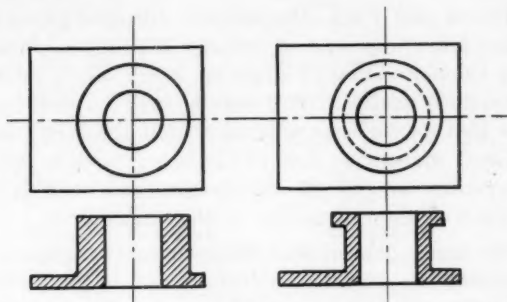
FLANGE BODY OF VARYING (Left) AND UNIFORM (Right) METAL SECTIONS, BOTH OFFERING THE SAME BOLTING SURFACE.
